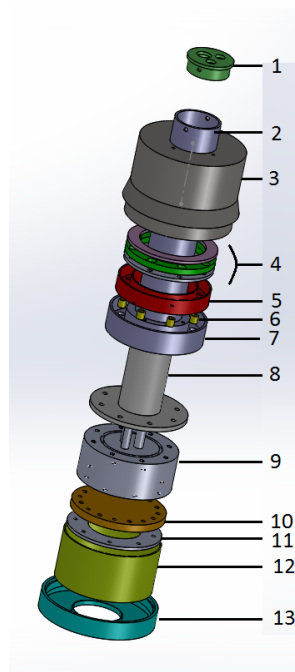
Technical drawing of the sputtering cathode optimized for high-pressure sputtering in oxidizing atmospheres. The function and material of the different parts is explained in Table 3.1. Designed with Solidworks 9.1.
